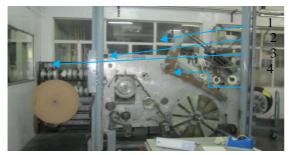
Actual picture of spiral press machine (1.Pressure Arm, 2.Cassette, 3. Capacitor Strip, 4.Spindle)
